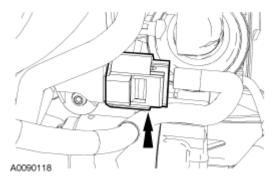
Locating Exhaust Gas Recirculation (EGR) Coolant Hose And Electrical Connector Courtesy of FORD MOTOR CO.
